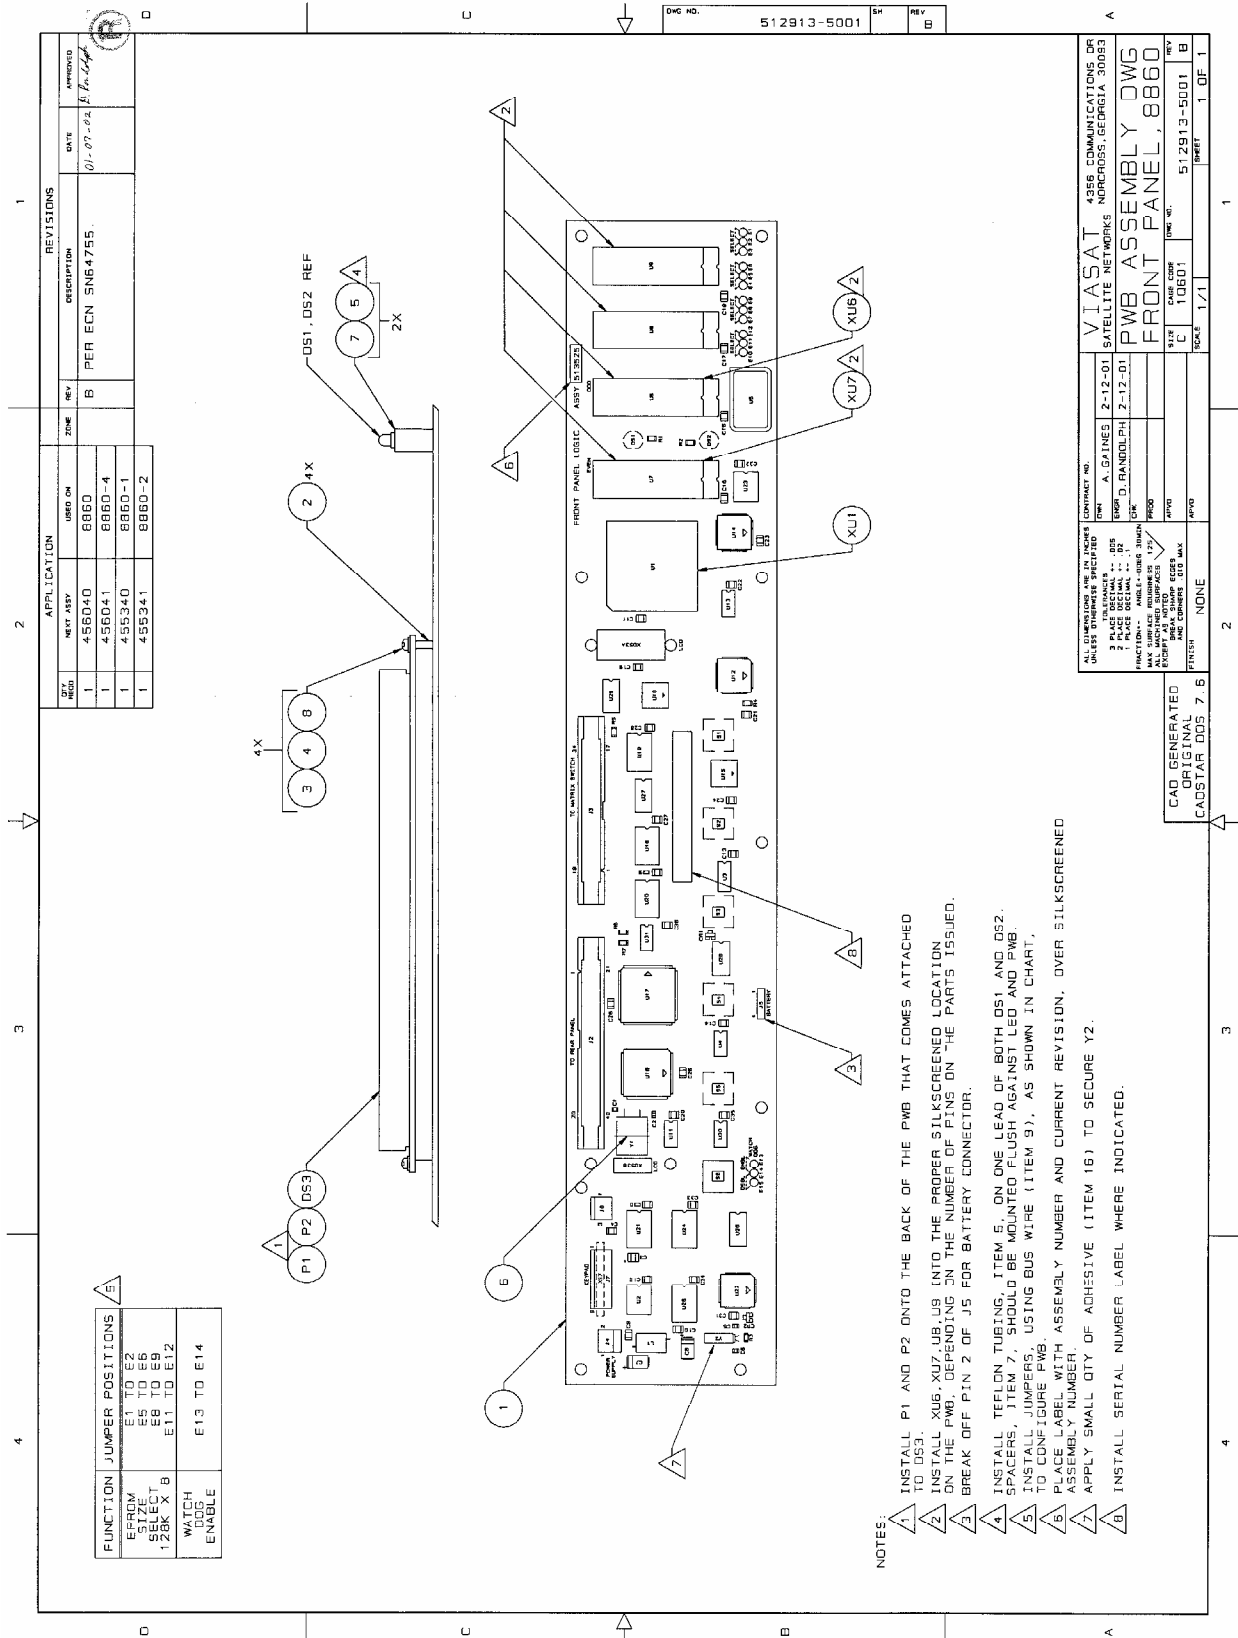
Front Panel Control Board Assembly Diagram, 512913-5001B
